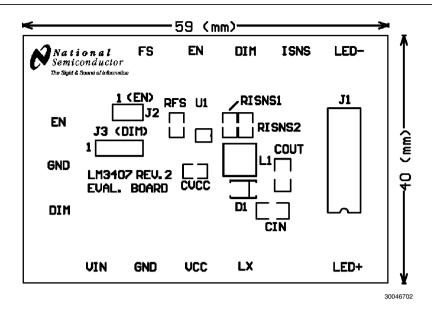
LM3407 Evaluation Board PCB Top Overlay
